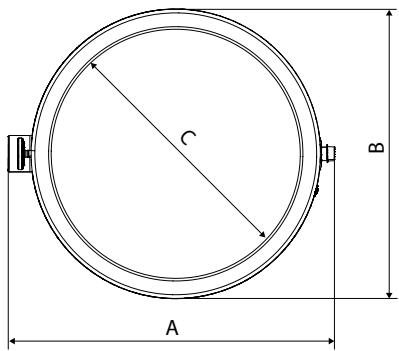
Dimensions of the BA-ST 3015-1F storage tank
